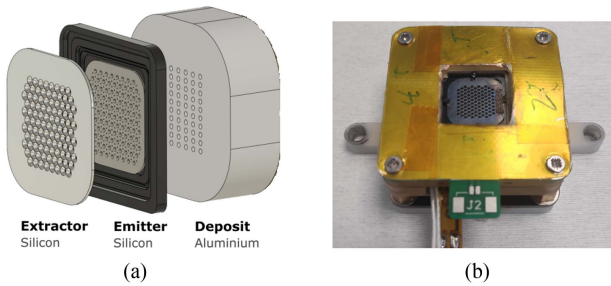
ATHENA-XM0 thruster head. (a) Exploded view. (b) Experimental assembly.
